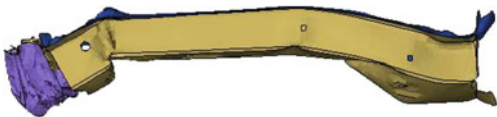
The right longitudinal beams design plan.3 (the above is plan 2)
